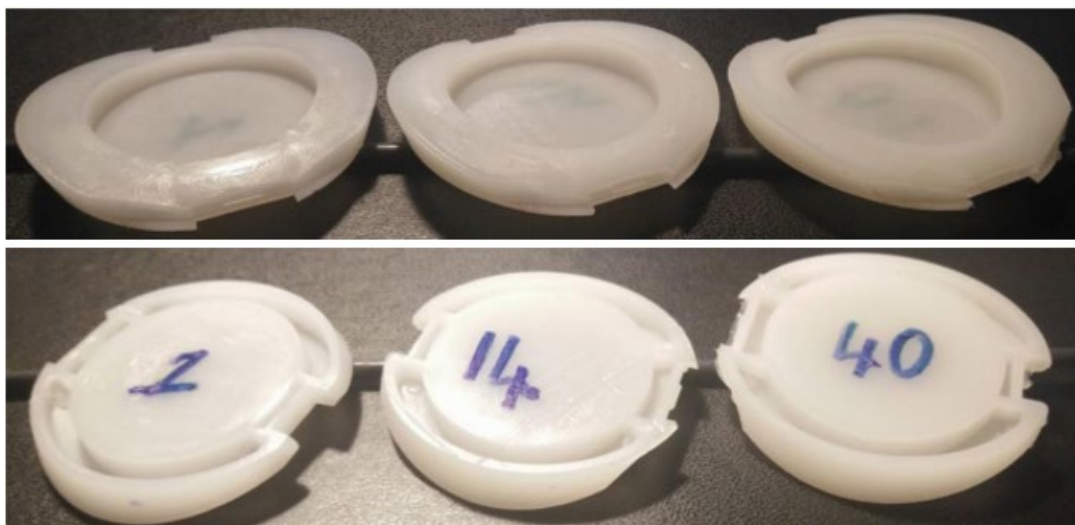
Cosmetic compact bases top and bottom view molded using MJF mold inserts.
